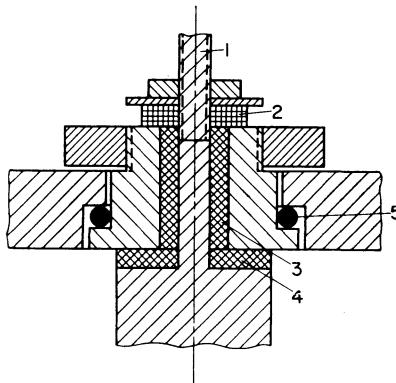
Lead-through, sealed by a cylindrical gasket: (1) electric lead; (2) insulation washer; (3) cylindrical rubber; (4) flat rubber gasket; (5) O-ring (dimensions of the lead-through see Fig. 4.38)
